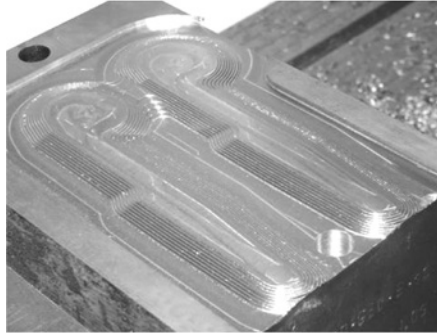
The rough machining of the forming cavity; ‘spiral’ milling strategy – option of rounding sharp passes for HSM.
